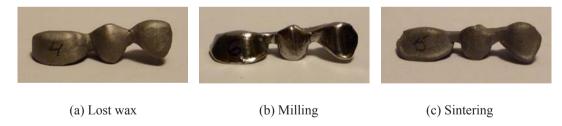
(a) Cr-Co fixed partial denture made using the lost wax technique; (b) milling; (c) selective laser sintering.
